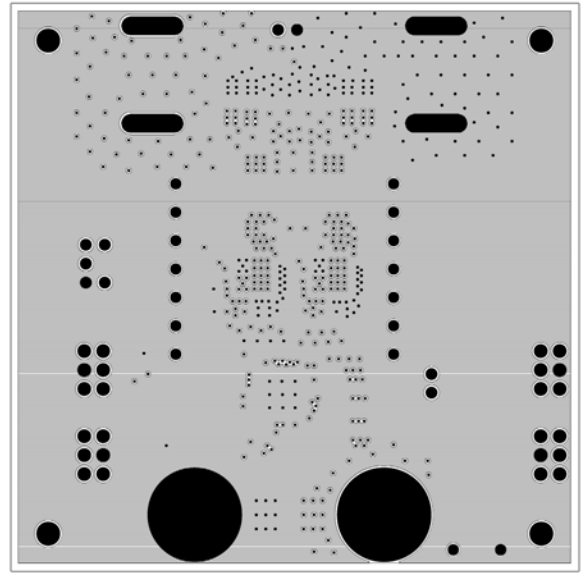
PCB - INNER LAYER 4 (TOP VIEW)
